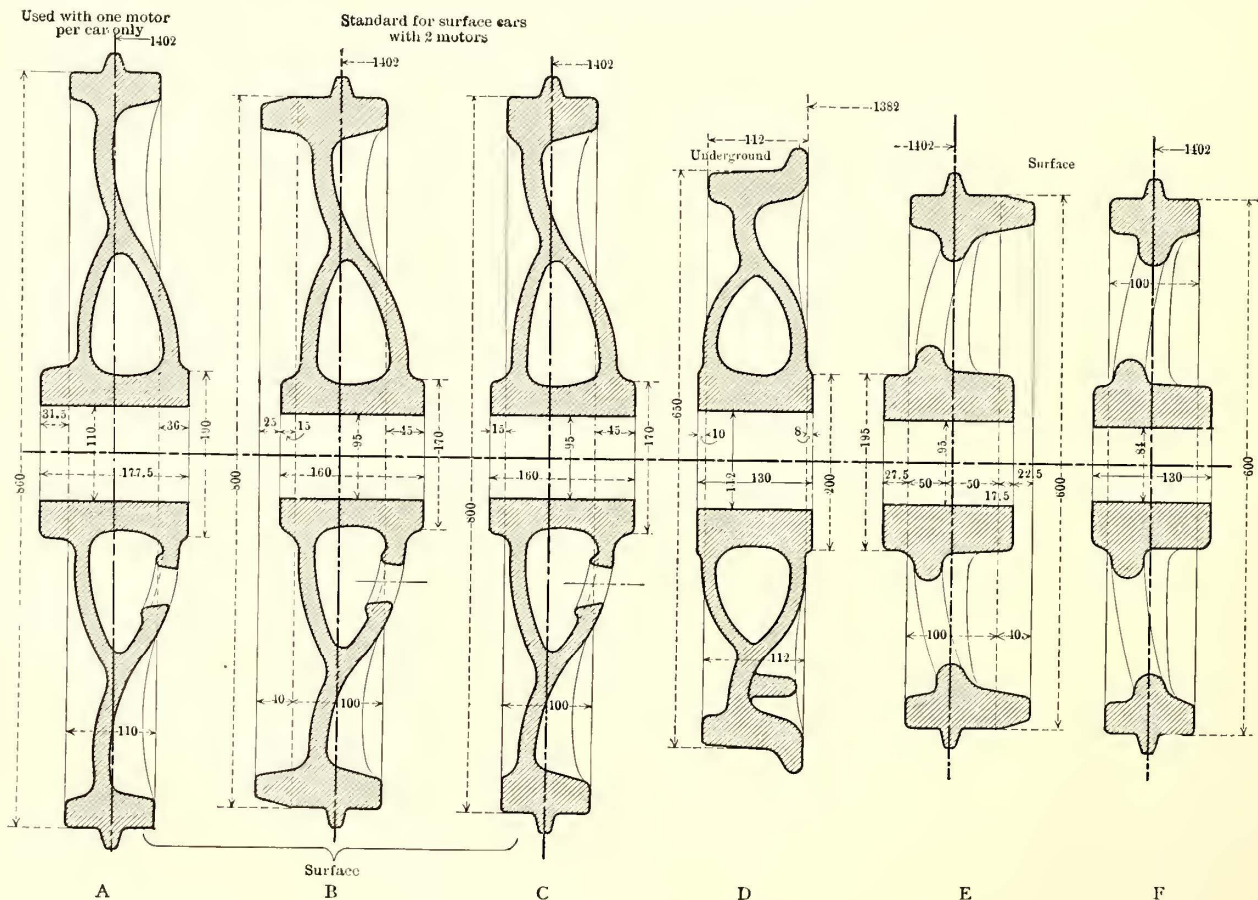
SECTIONS OF ALL TYPES OF WHEELS USED ON BUDA-PEST STADTBahn AND UNDERGROUND RAILWAY
